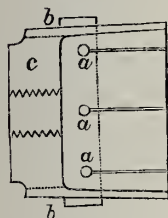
represents a spring-chuck which is used for holding very slight work, that requires to be hollowed out.
